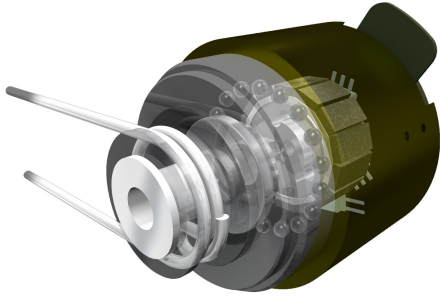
Drive unit with ILM 25 and harmonic drive gearing
